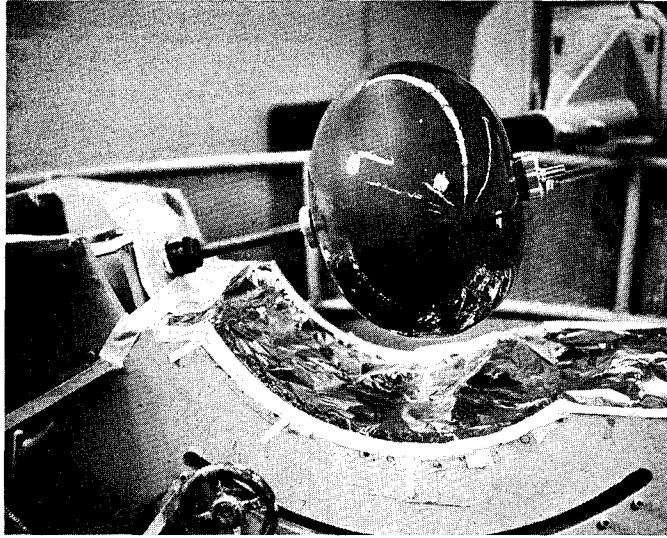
Metal-Shell Assembly in Filament-Winding Machine
